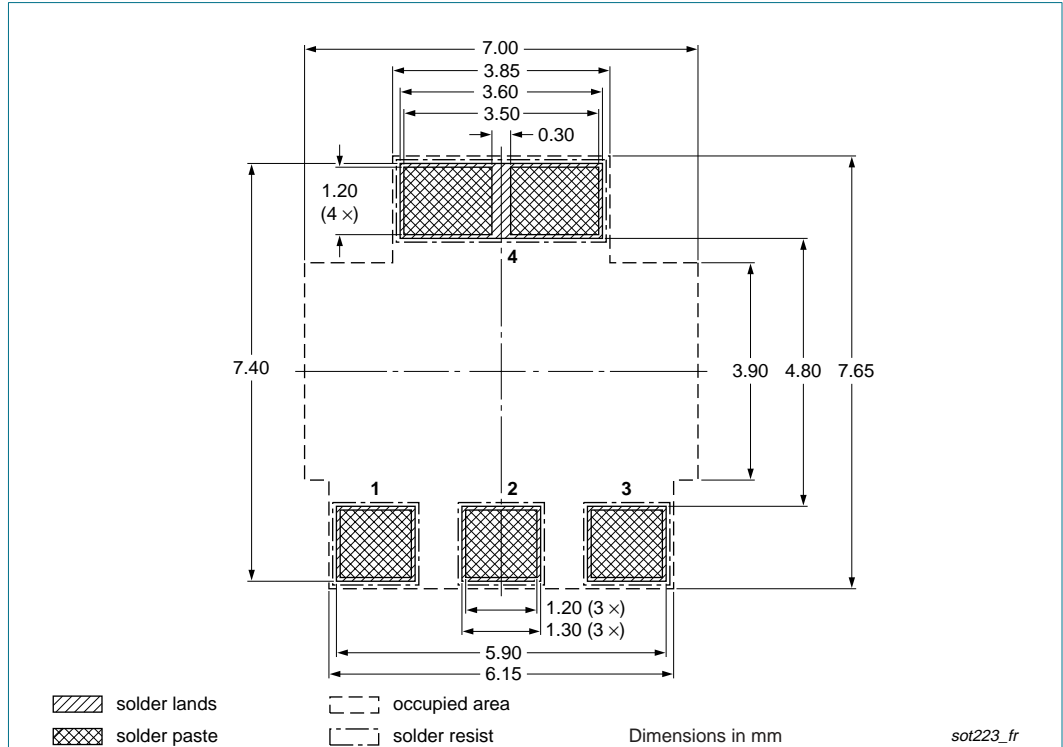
Reflow soldering footprint SOT223 (SC-73)
